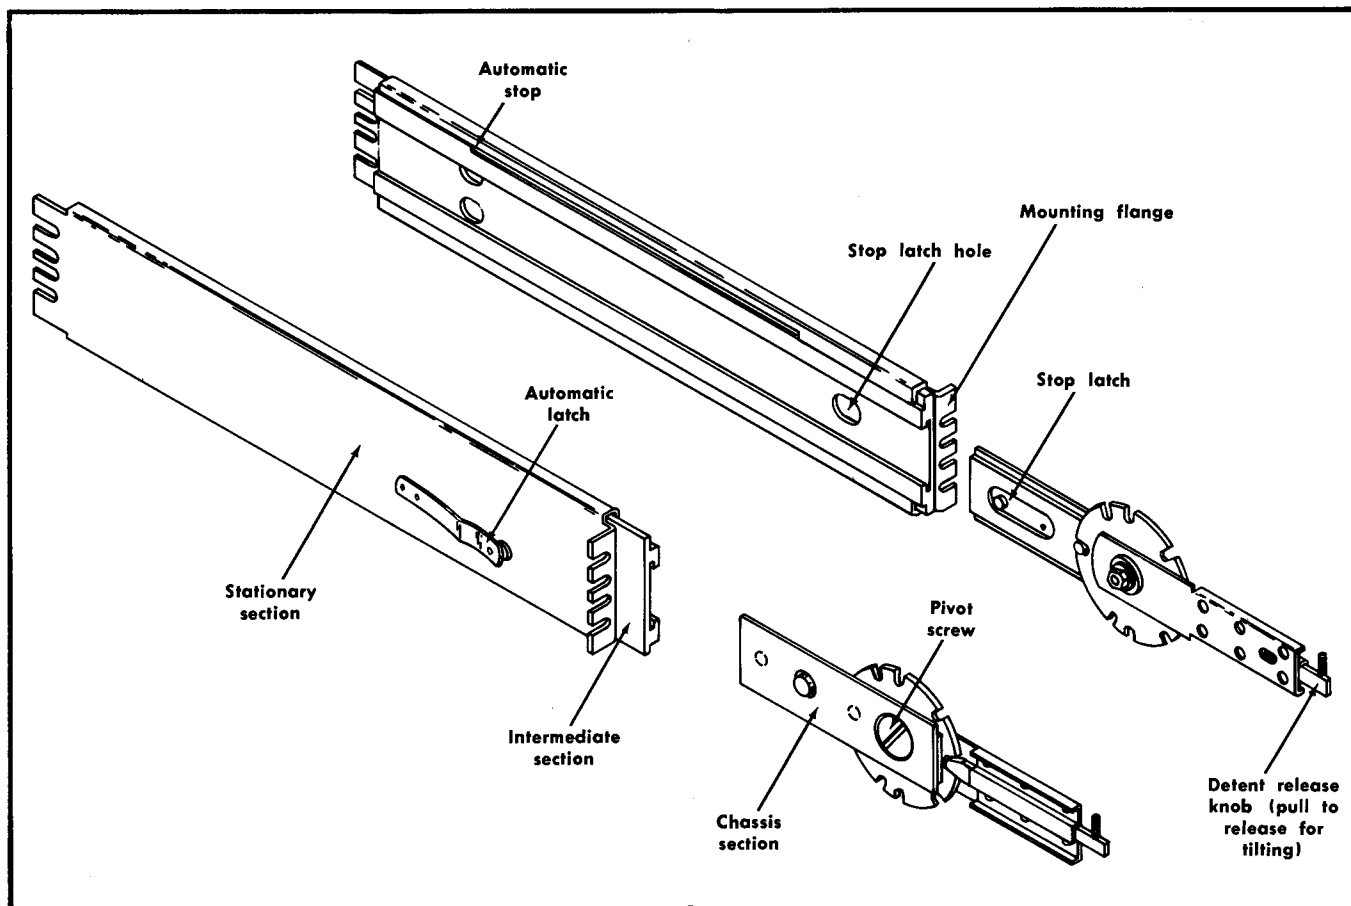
Slideout track assembly for the left side of the instrument.
